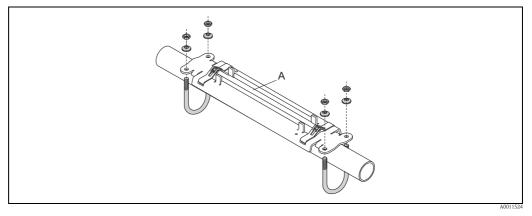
Mounting the Prosonic Flow P sensor holder (DN 15 to 65 / ½ to 2½") with U-shaped screws
